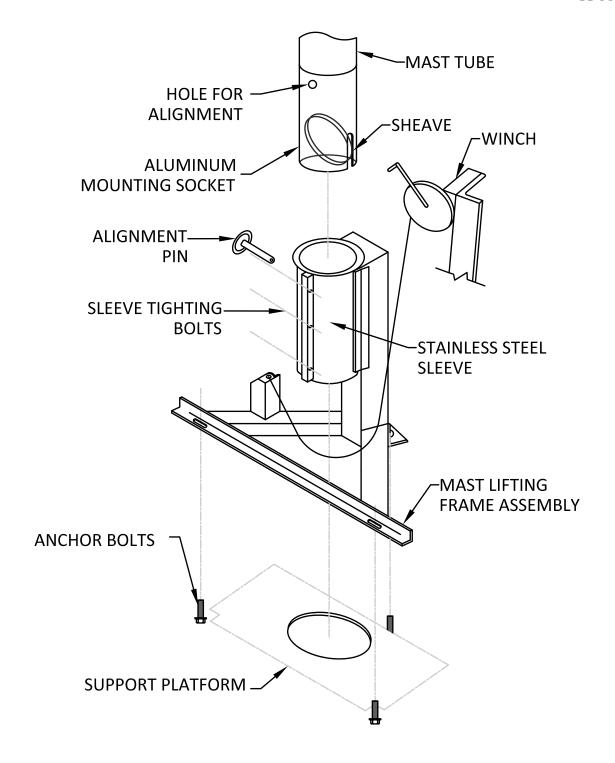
ATTACH MAST LIGHTING FRAME TO SUPPORT PLATFORM (Ref. Section 9.4.2)
